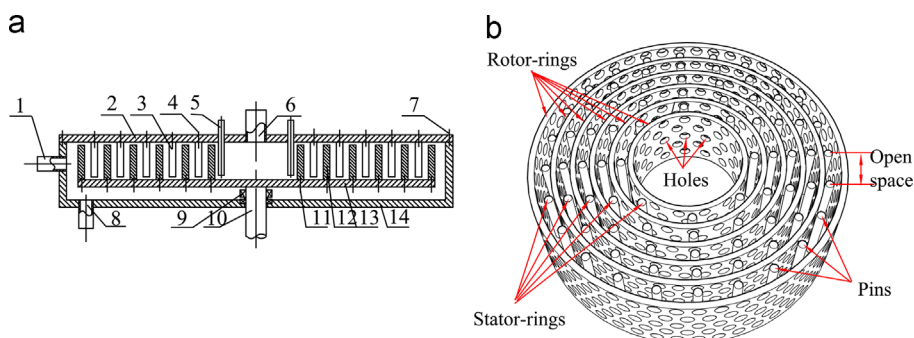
Schematic diagram of RSR. (a) Structure of RSR; (b) 3D diagram of rotor-rings and stator-rings (1) gas inlet; (2) cover cap; (3) stator; (4, 7, 11) bolts; (5) nozzle; (6) gas outlet; (8) liquid outlet; (9) seal; (10) shaft; (12) rotor; (13) rotor seat; and (14) casing.
